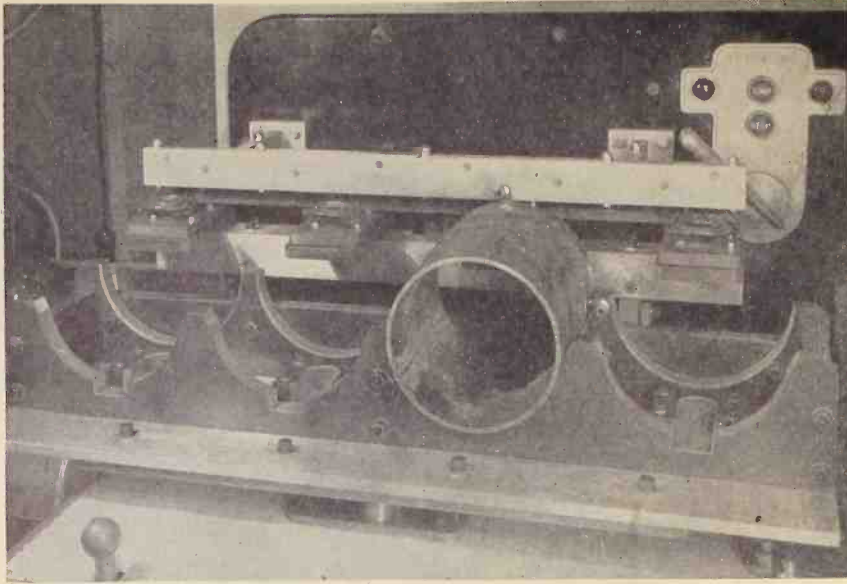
Spiral-type work-coils for brazing suction fittings into compressor housings.
